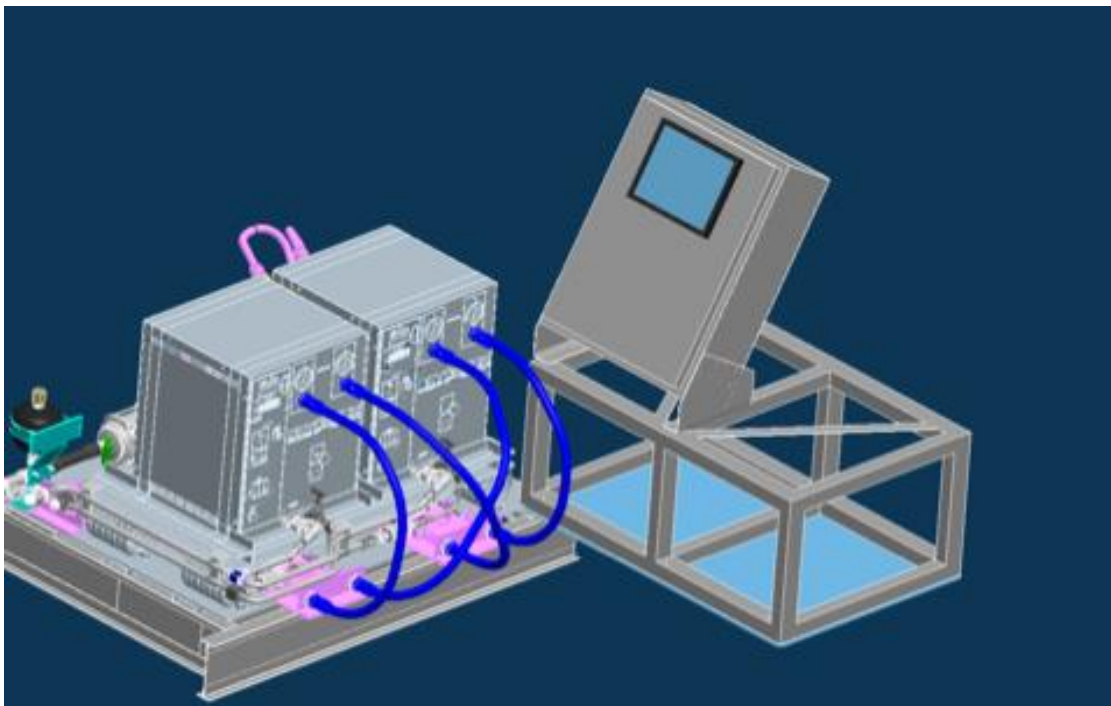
Cryocooler Compressor Package Location, 3D rendering showing WVM electronics rack and notional Upper Deck (Main) Control Panel mounting
